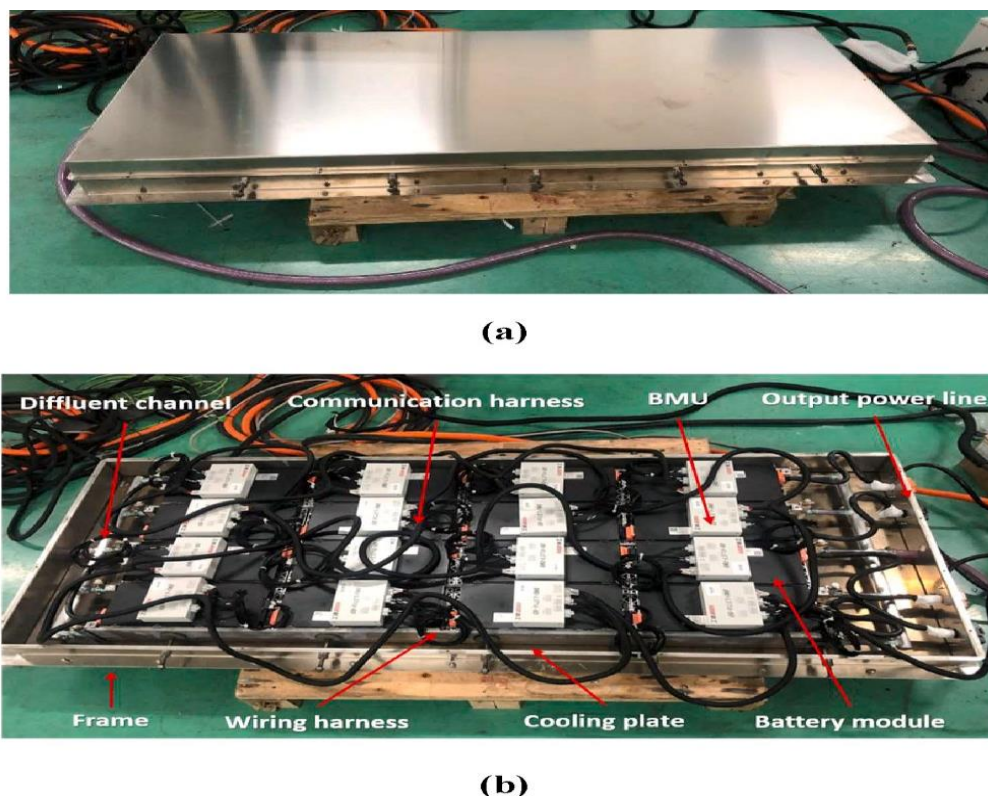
(a) Battery pack prototype, and (b) key components inside the pack.
